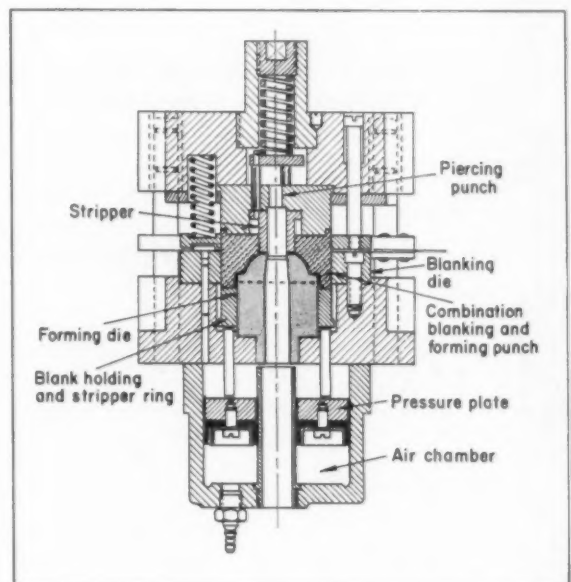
Shown in the closed position with the workpiece completely formed, this one-stroke progressive die set does a job originally handled in four separate operations in conventional progressive dies.
